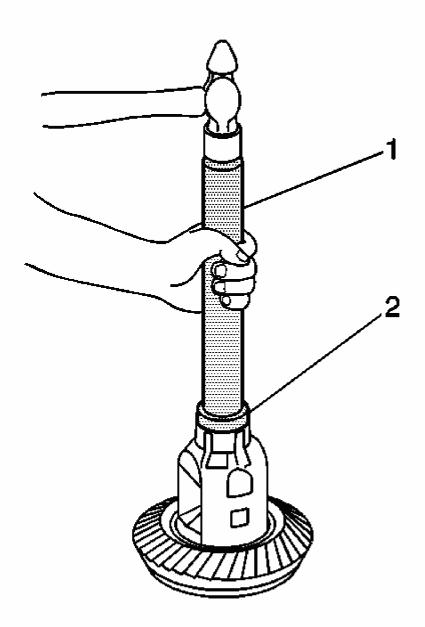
Driving The Differential Side Bearing Into Position Courtesy of GENERAL MOTORS CORP.
